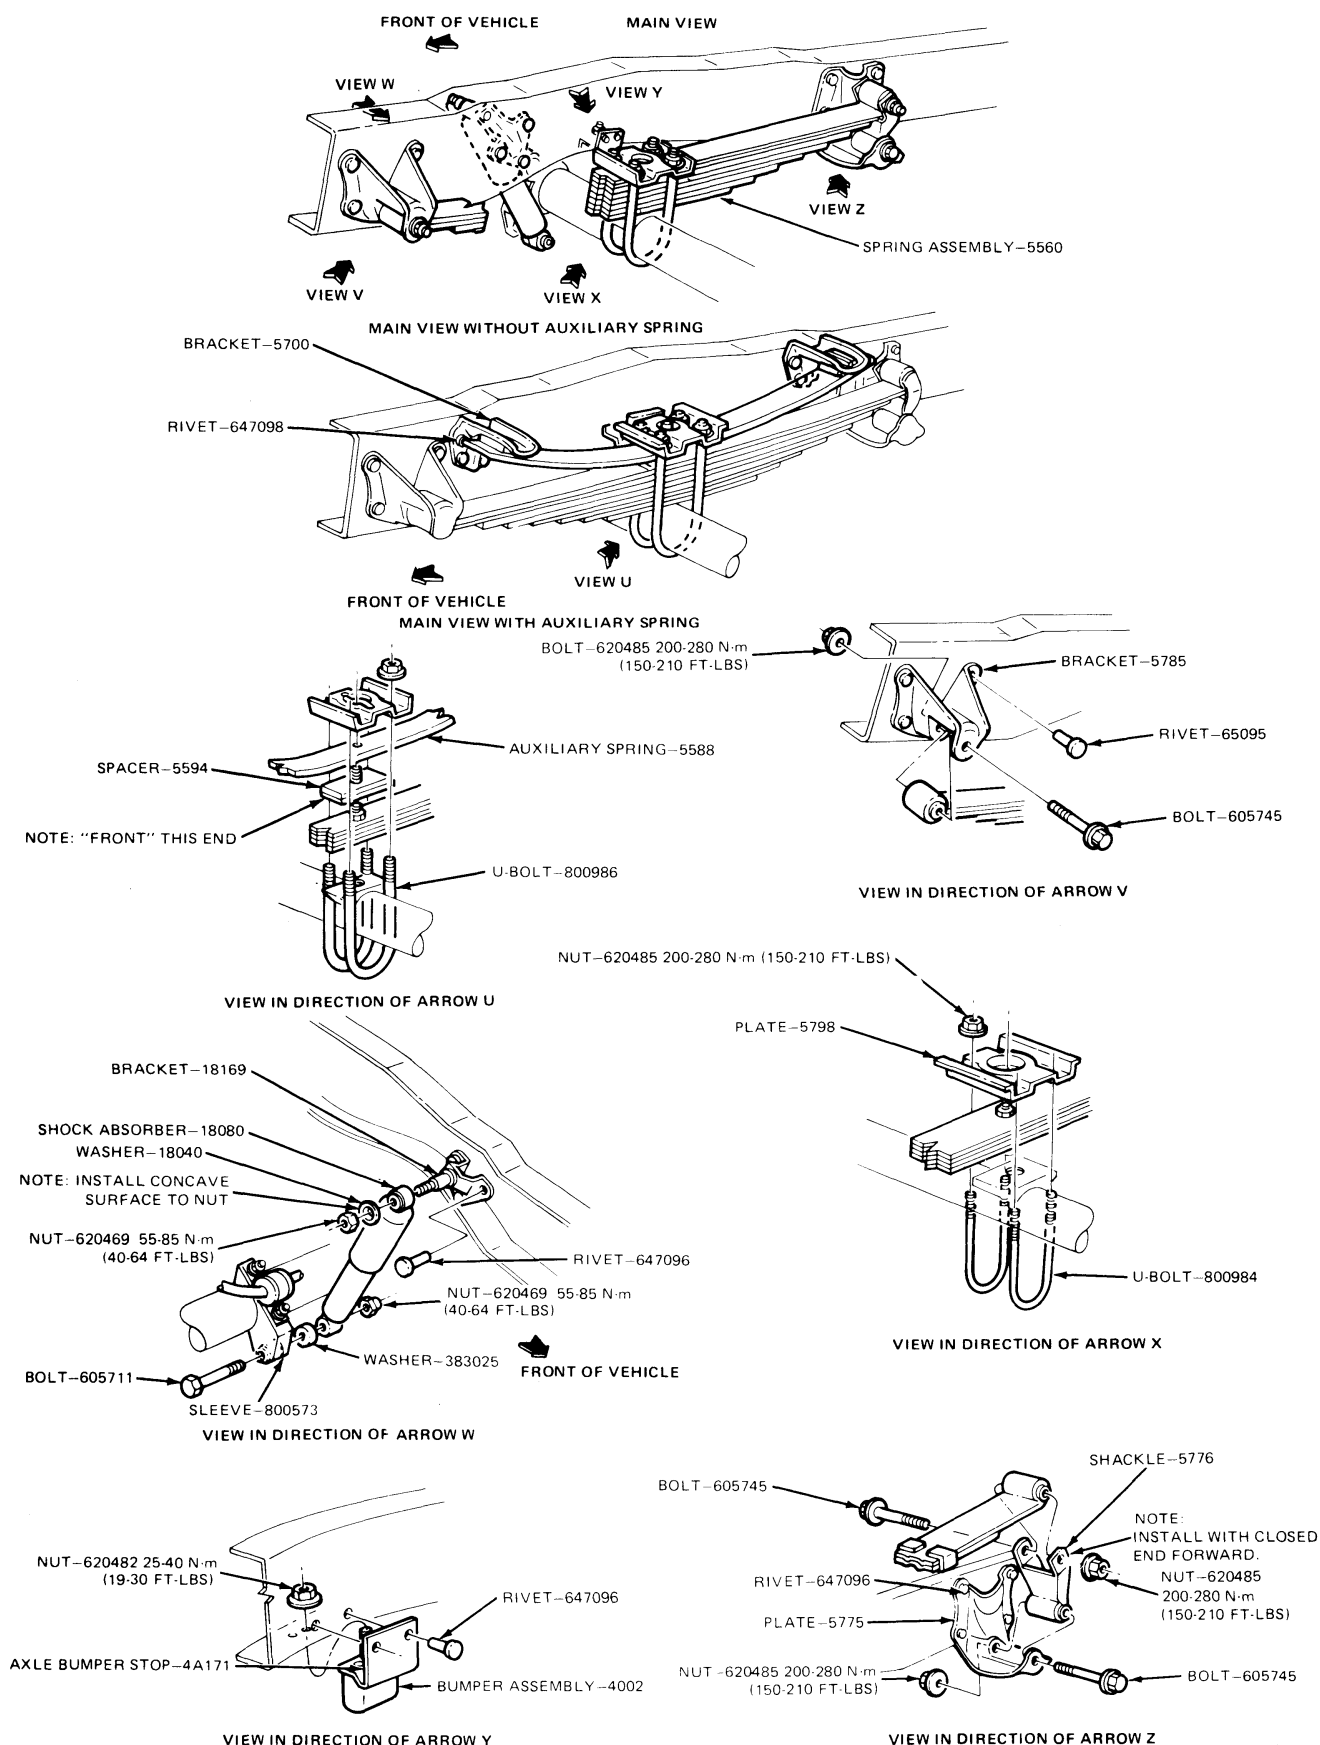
Rear Spring Installation—F-350 (4 x 2) Chassis Cab
